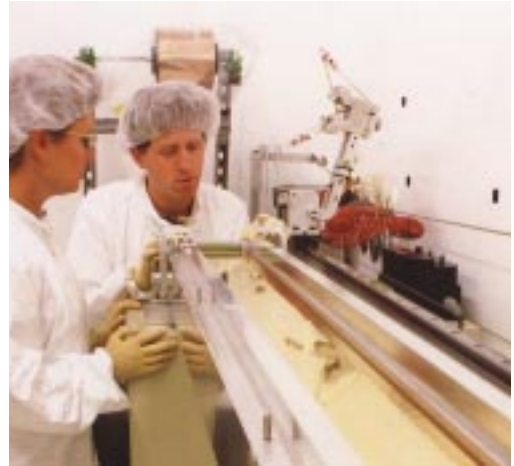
Technicians adjusting the position of an end card before rotating the arm of the epoxy applicator so that the syringe tips ride along the stainless steel wires. The wire guides are in place over the gold / Mylar sheet, which was unrolled from the spool in the background.
